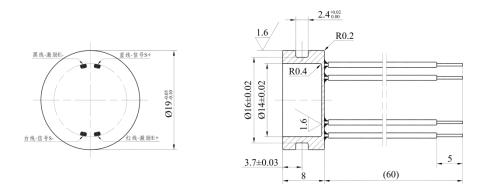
Dimension of gauge pressure and lead definition (Side seal)
